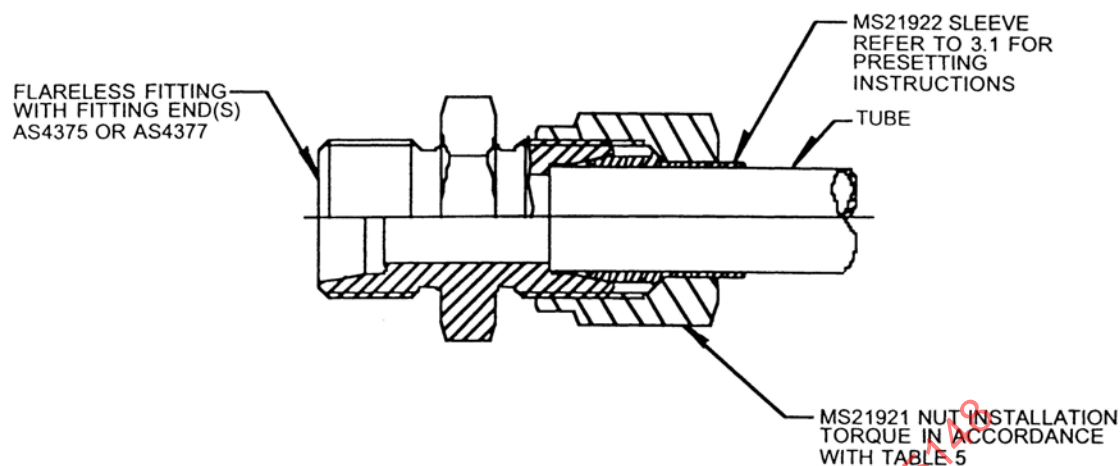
Bite Type Flareless Sleeve Tube Assembly
